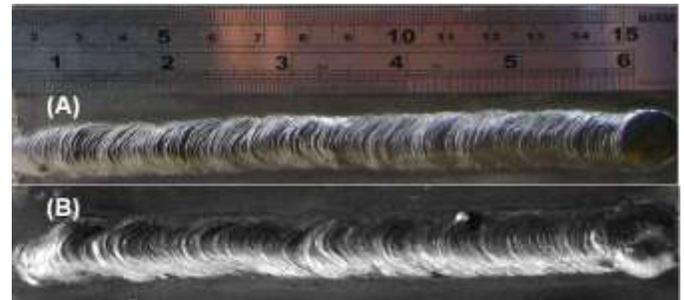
Visual appearance of the bead on plate weld deposited with impermeable electrode (A) and conventional E7018 electrode (B).
